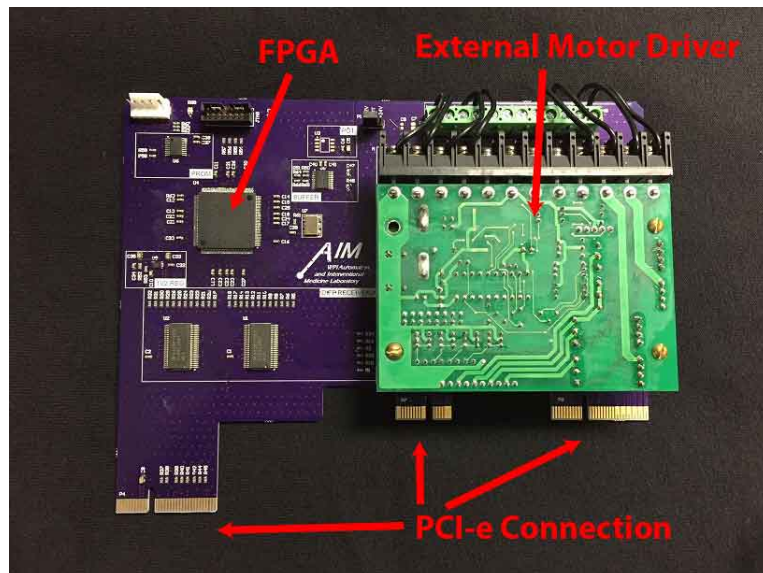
A type of motor control daughter card. This card has an FPGA which communicates to the backplane and uses an external Shinsei D060 motor driver.
